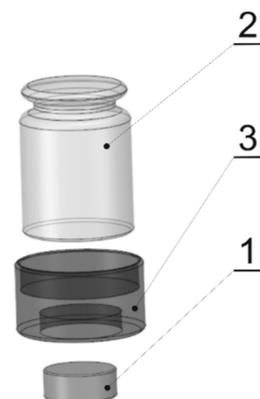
View of the sample with a socket and a weight: 1—analyzed sample, 2—weight, 3—socket.
